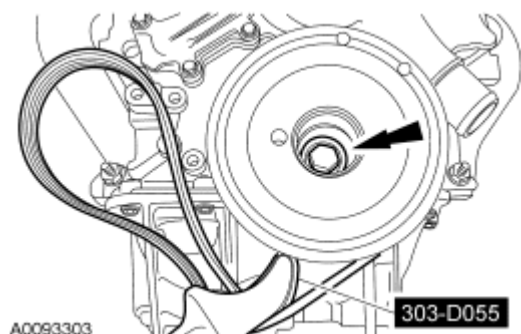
Holding Crankshaft Pulley Using Special Tool
